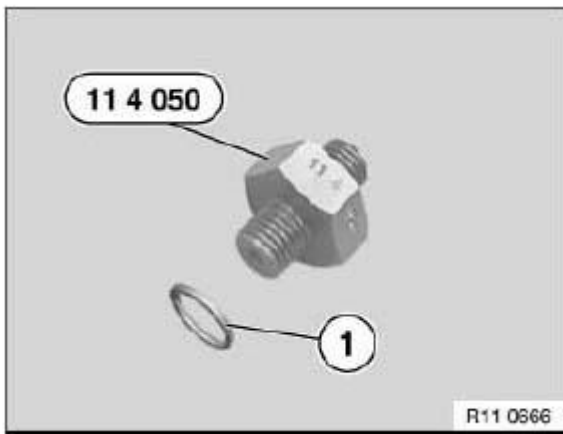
Identifying Sealing Ring And Special Tool (11 4 050)
